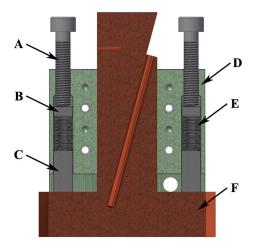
Cross section through the terminal and terminal support structure showing provision for axial movement. A: Adjustment screw; B: Upper plunger; C: Lower plunger; D: G10 terminal housing; E: Belleville washer stack; F: Copper terminal base.
